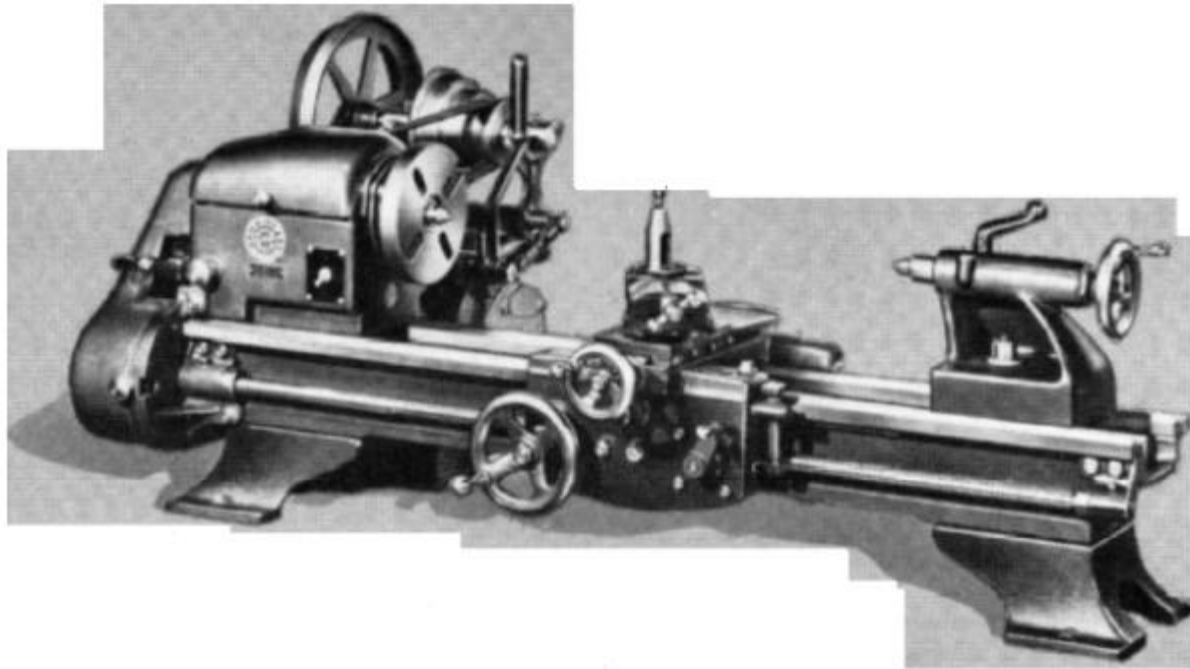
WARDS POWR-KRAFT BACK GEARED, SCREW-CUTTING LATHE FOR BENCH MOUNTING
